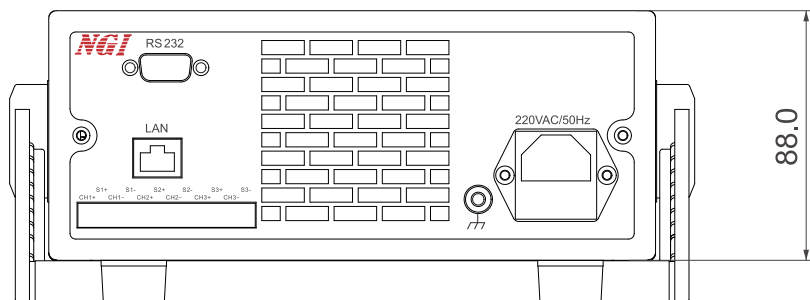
Rear Panel Dimension(mm) (N341X/N341XE Series)
